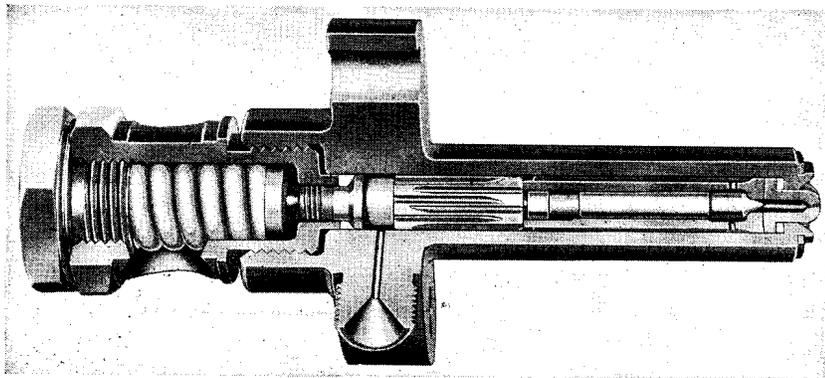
Injection Nozzle, Opposed-Piston Engine.
